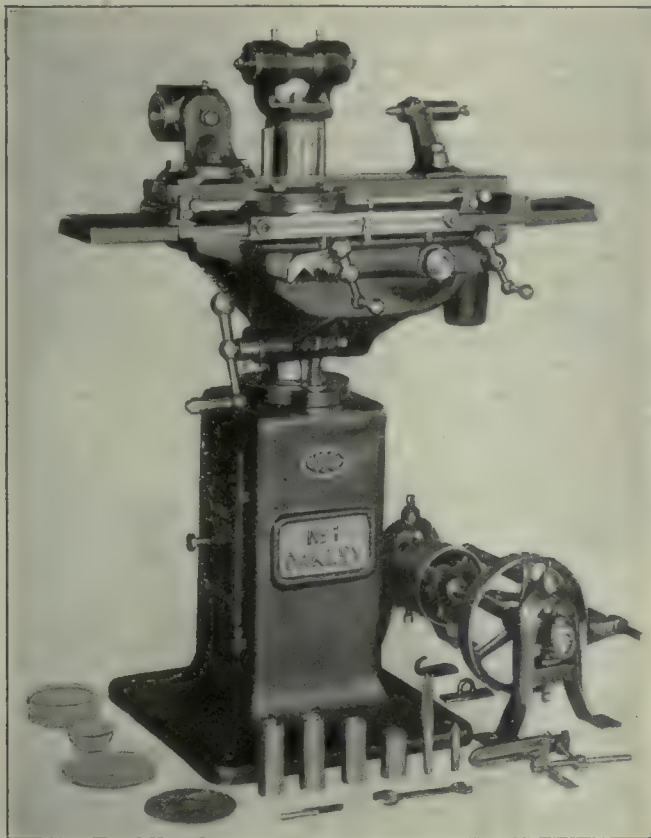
OAKLEY NO. 1 CUTTER GRINDER
